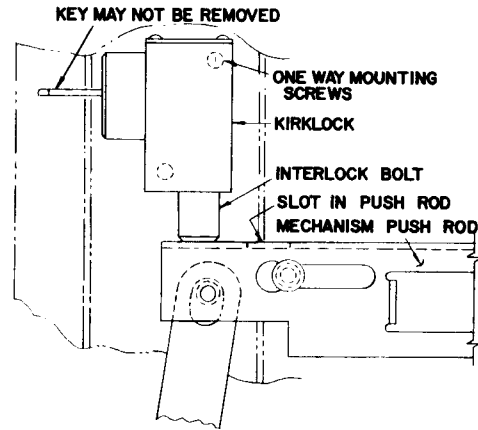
(0116B5047-0) Side View of Kirk Lock With Drawout Mechanism in the Connected Position
